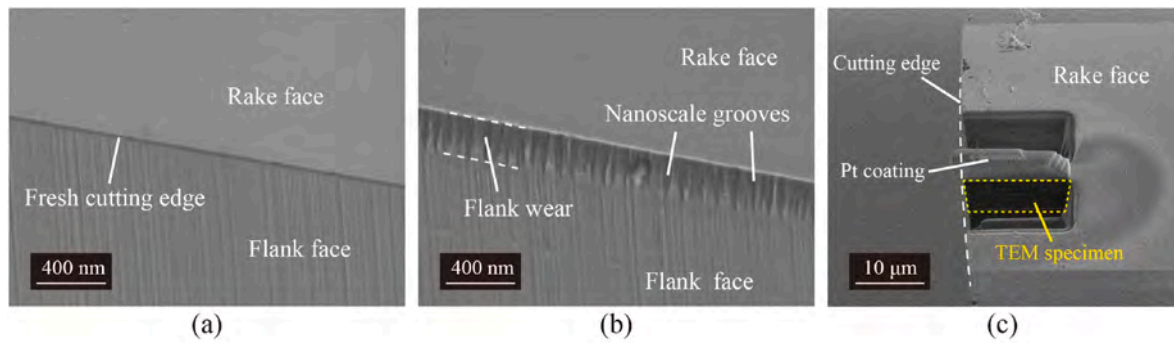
SEM images of the cutting edge of the tool: (a) before, and (b) after machining four dimples; (c) after the focused ion beam milling for preparing TEM specimen.
